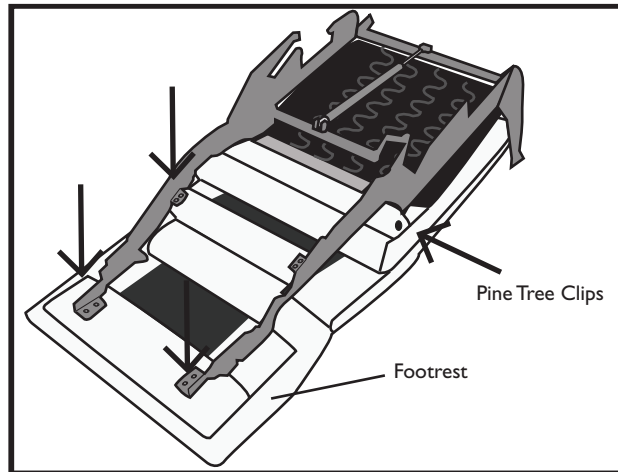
To remove the seat cushion from the mechanism, remove the bolts that are attached to the footrest and seat with a 1/4" socket and ratchet. There are two pine tree clips attaching a velcro flap to the mechanism. Pull out the two pine tree clips to detach the velcro flap.
